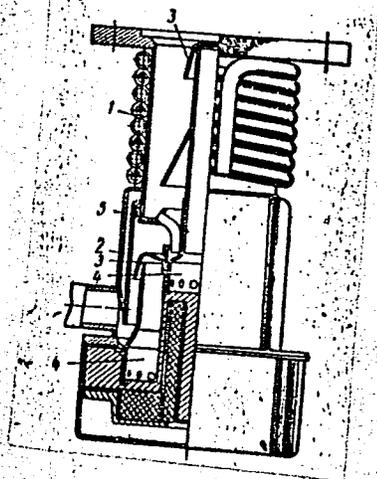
1--housing; 2--cooling jacket; 3--distributor nozzles; 4--condensers; 5--receiver
